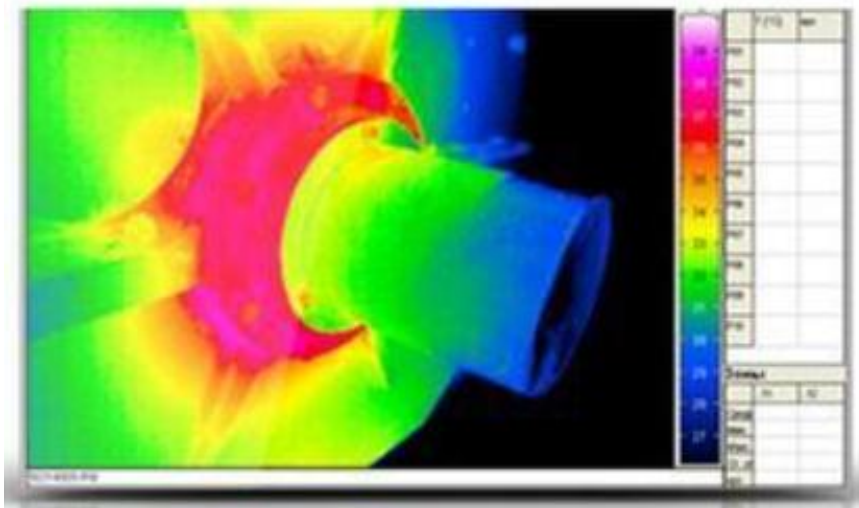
Thermal imaging photograph of the bearing assembly of the motor.
